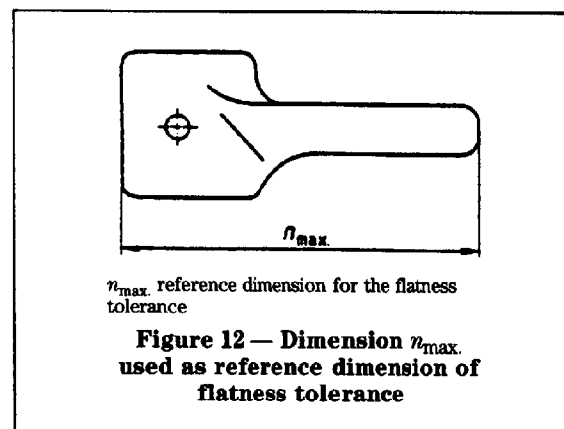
Dimension n_{max} used as reference dimension of flatness tolerance
